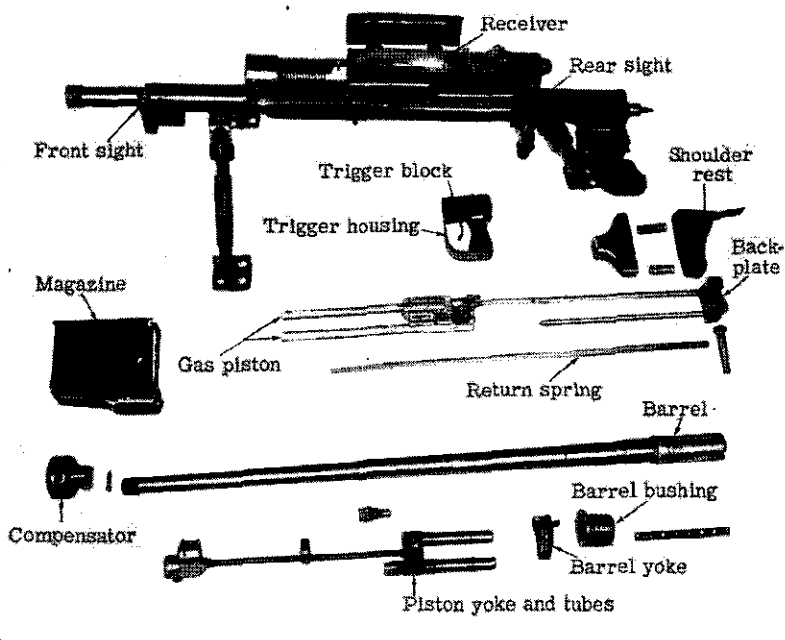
Model 97 (1937) 20-mm antitank rifle disassembled.
